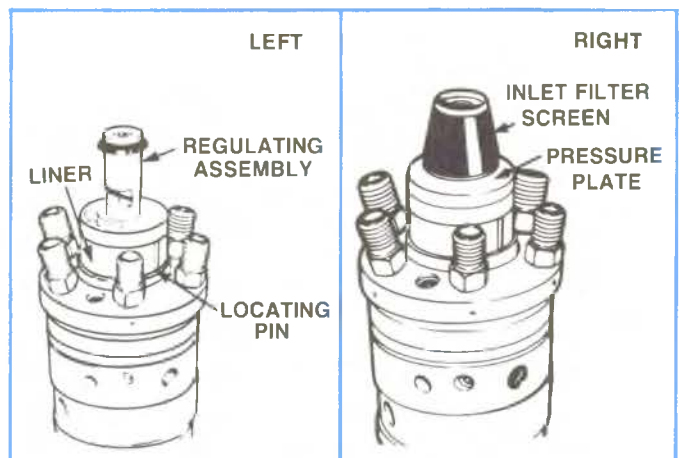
, Installing Regulator and Pressure Plate/Screen.
